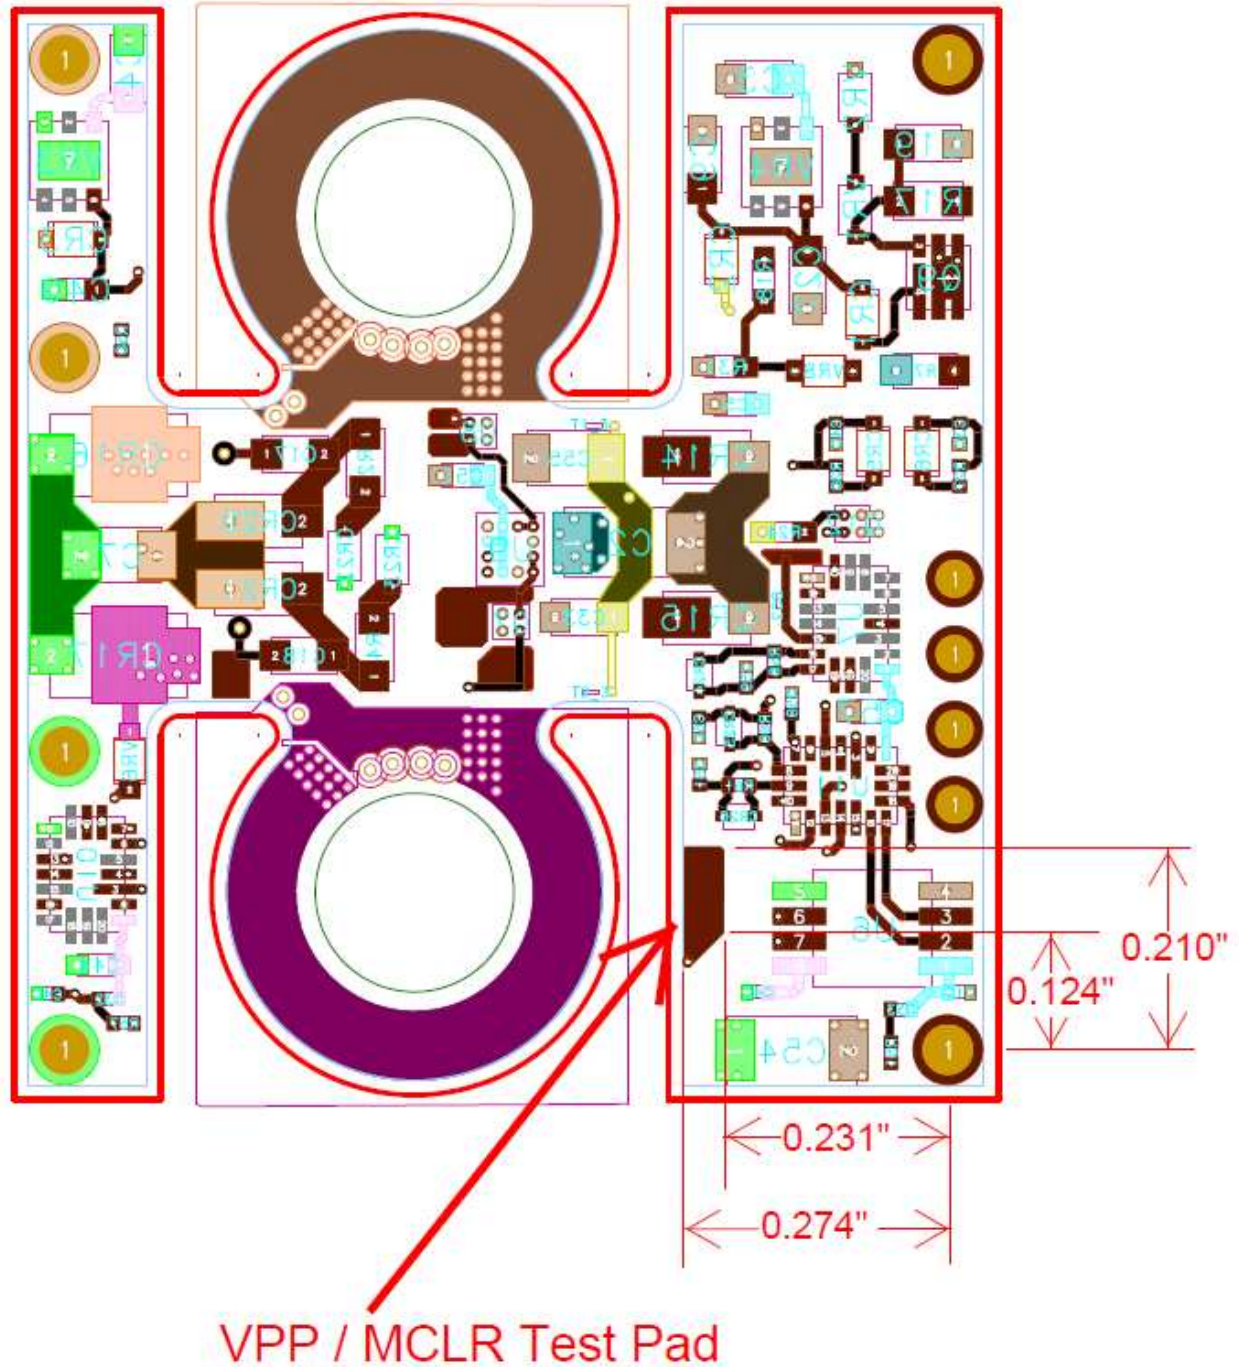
PWB Bottom View Showing Location of VPP / MCLR Pad
